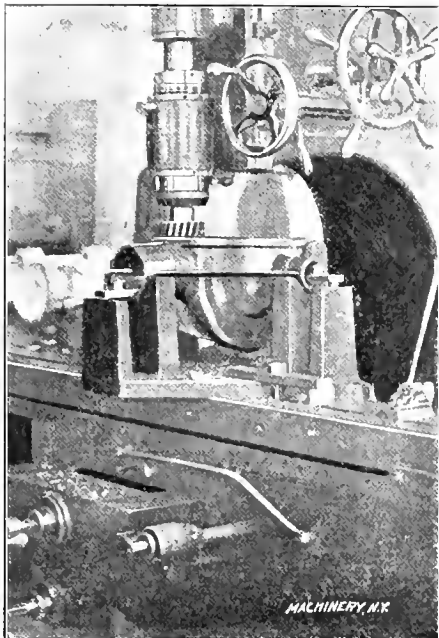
Facing Seats of Differential Covers in a Vertical Milling Machine
